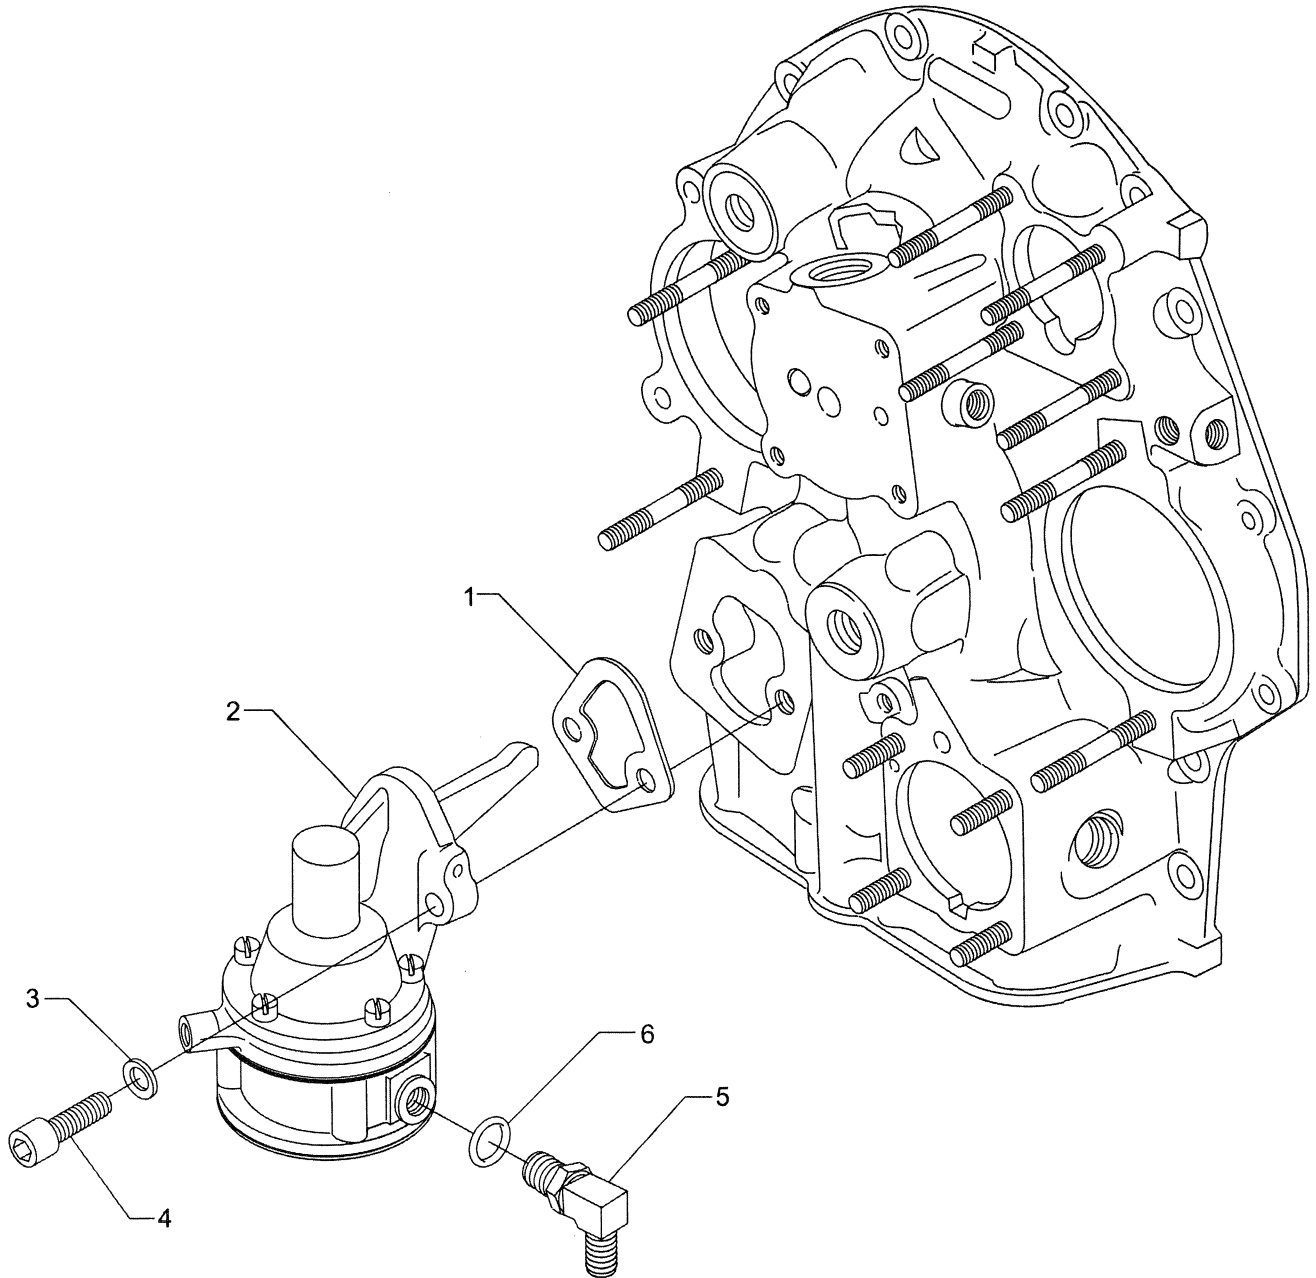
FUEL PUMP ASSEMBLY AND ATTACHING PARTS
